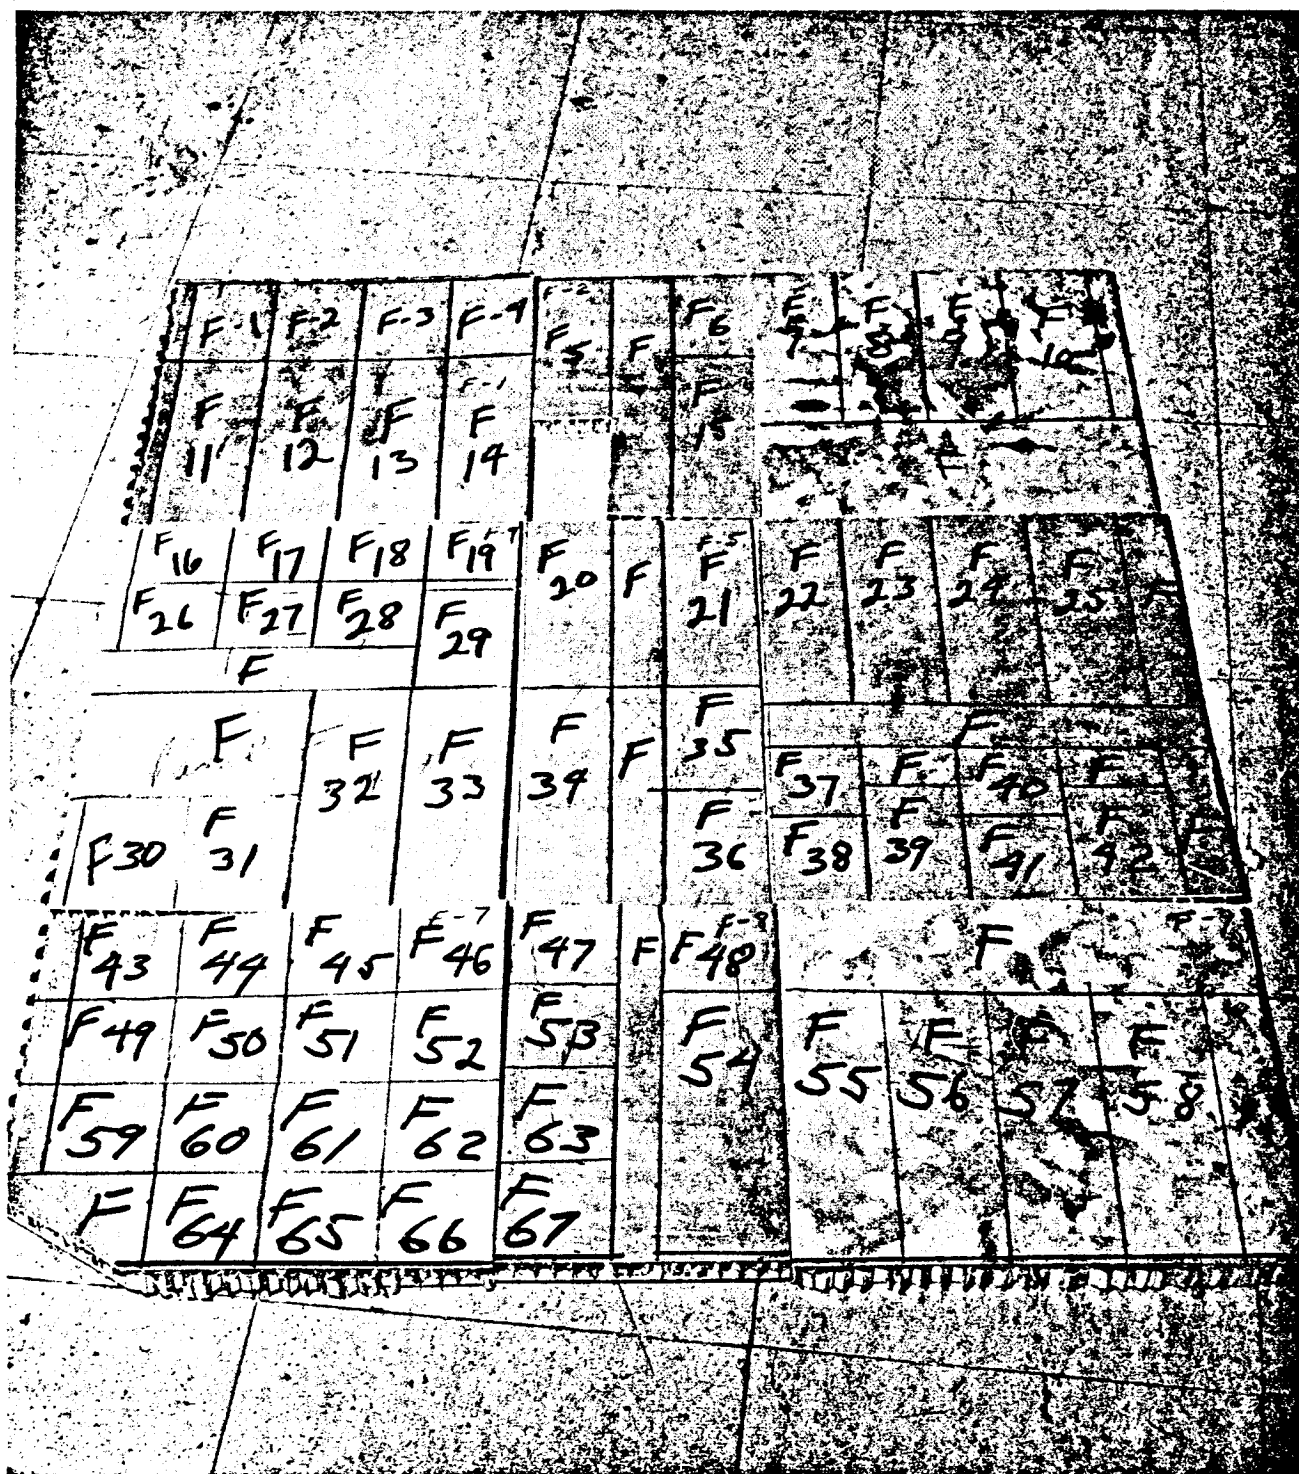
Braided Sandwich Panel F showing specimen layout.
